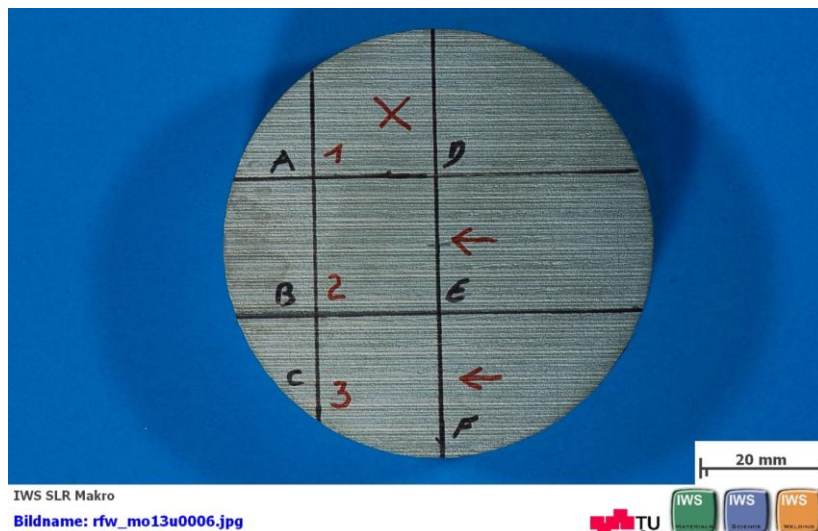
TZM specimen before machining, x = cross-sectional view on embedded specimen 1, ← = trans-sectional view on embedded specimen 2 and 3
